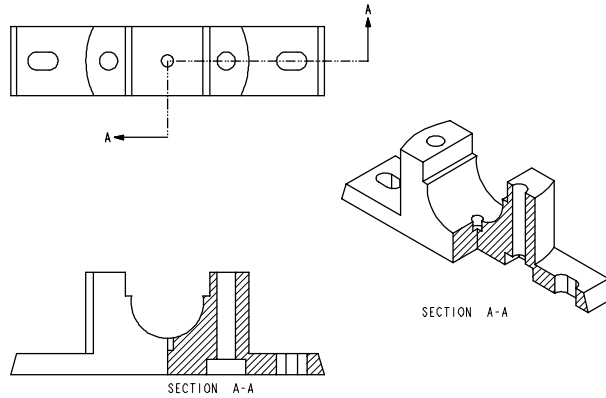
Top view, Full section front view, and Full section isometric view
